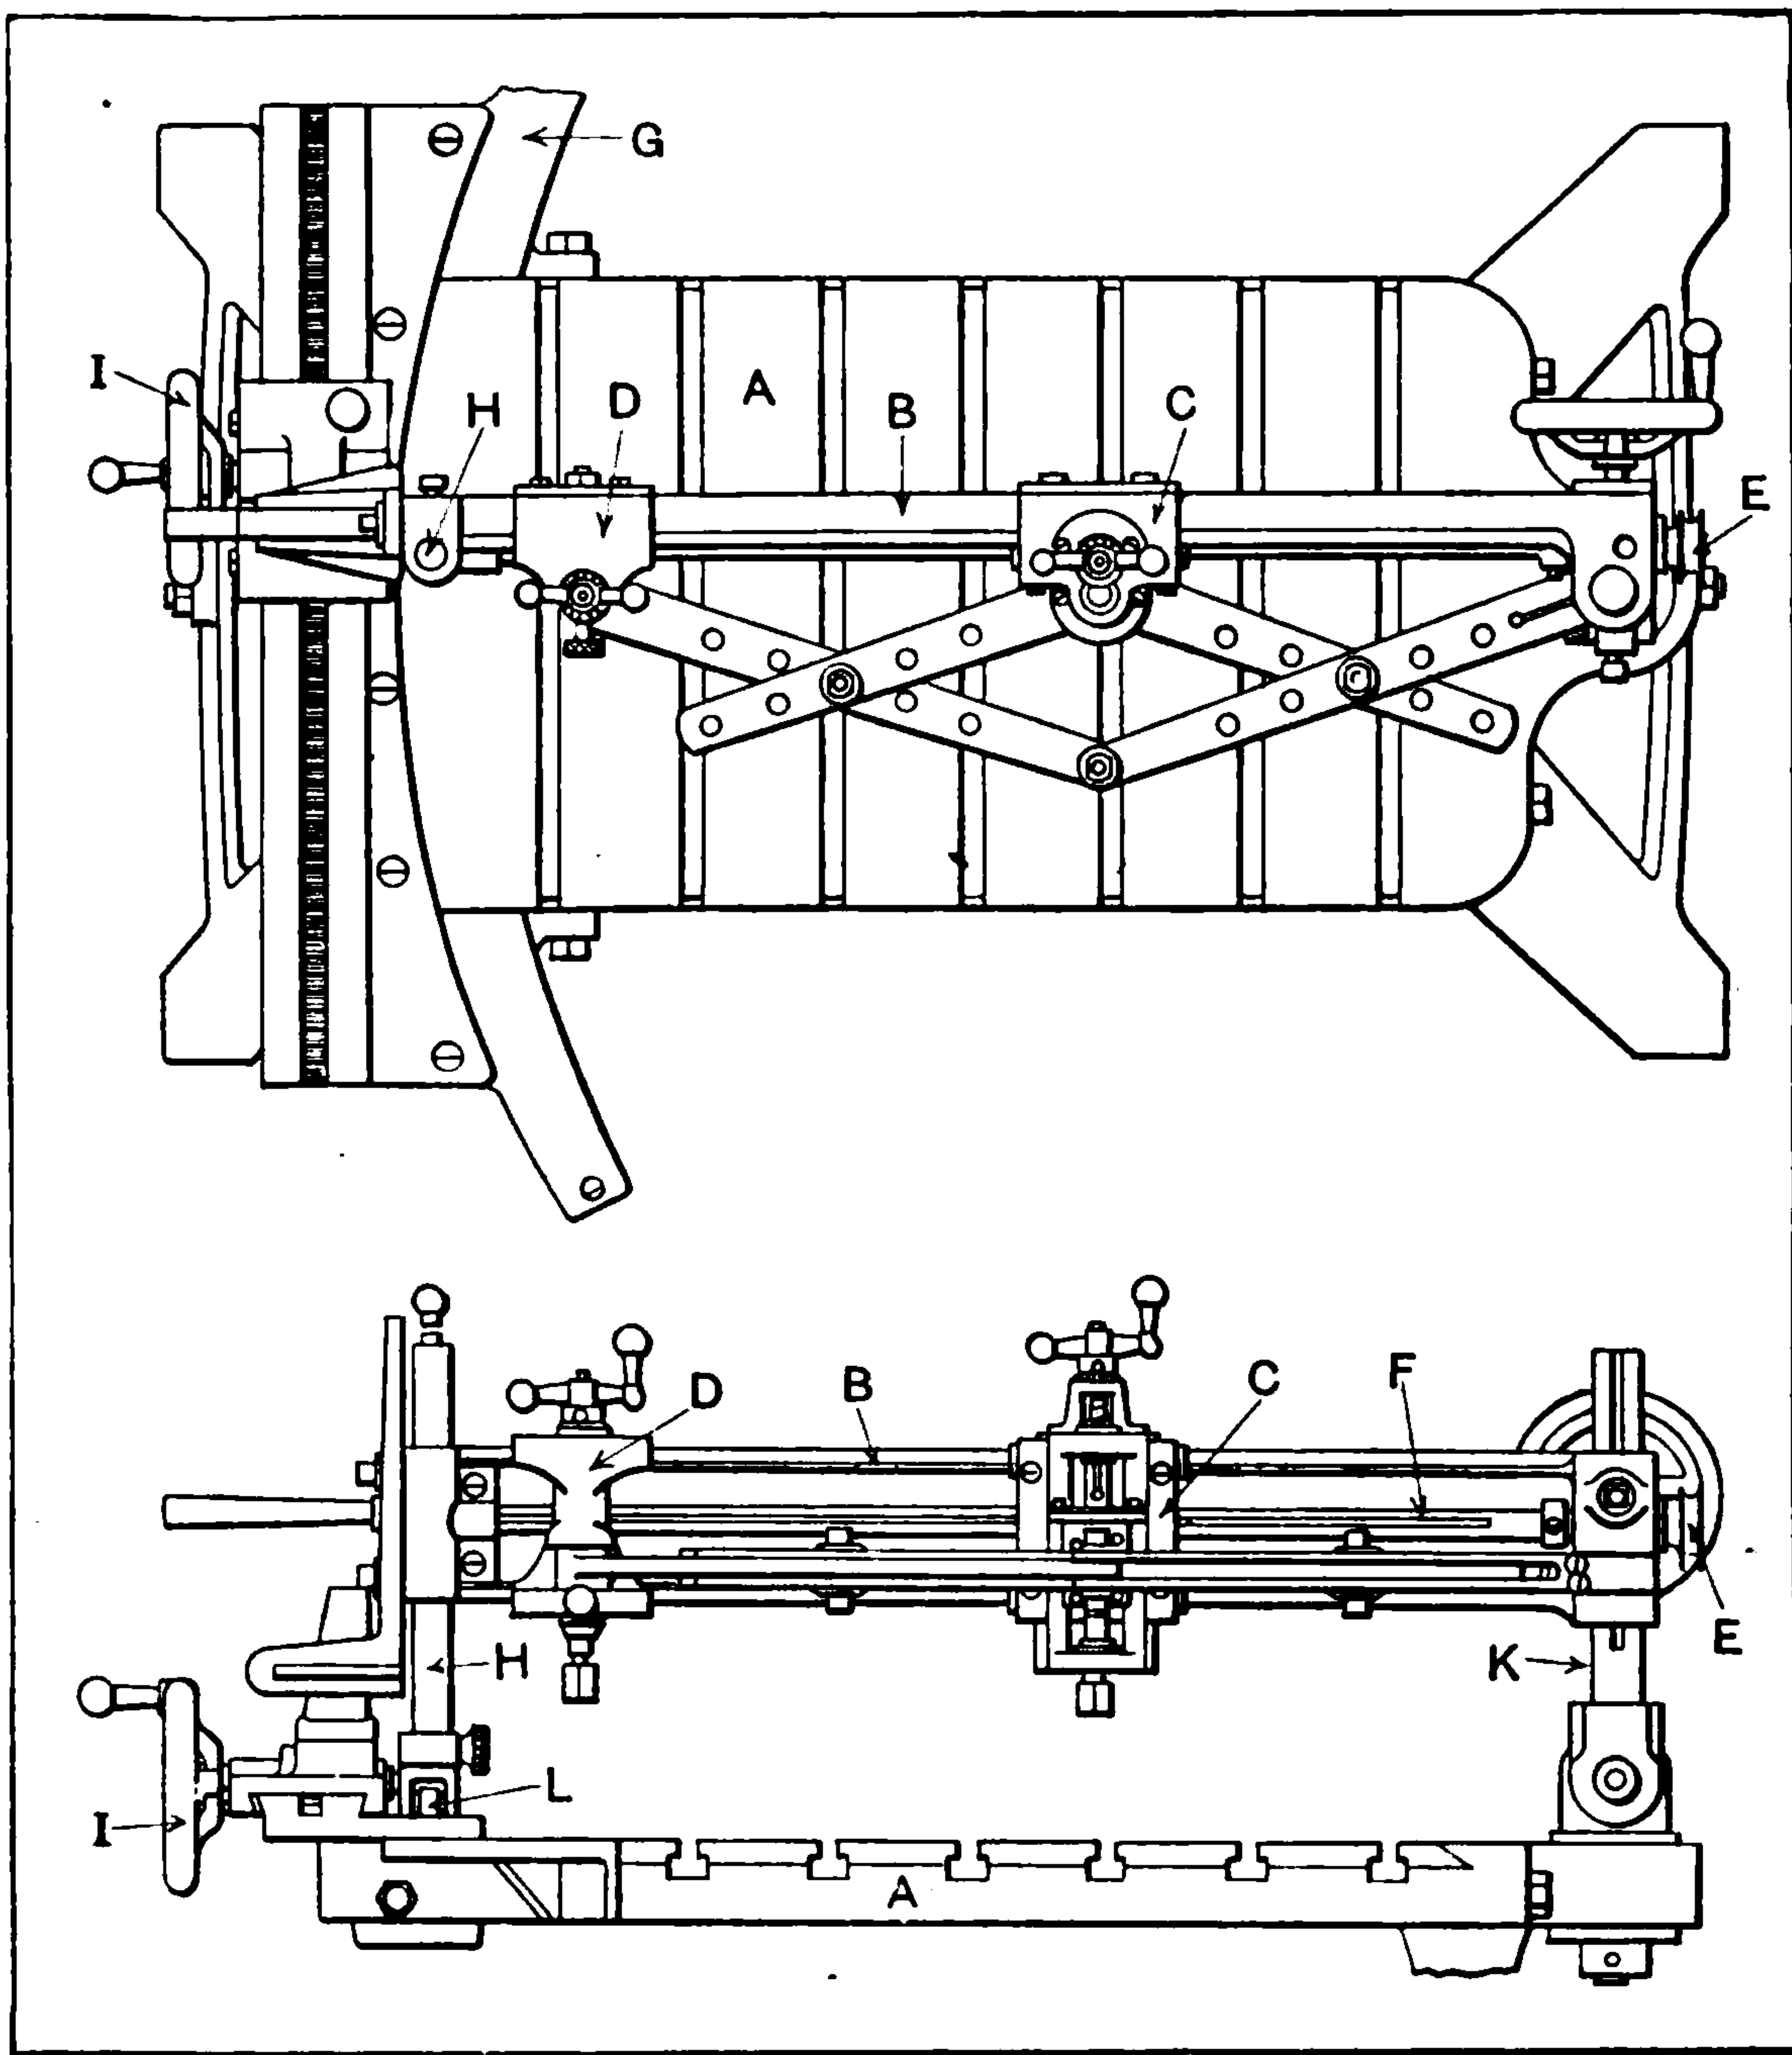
Engraving and Die-sinking Machine of Pantograph Type
